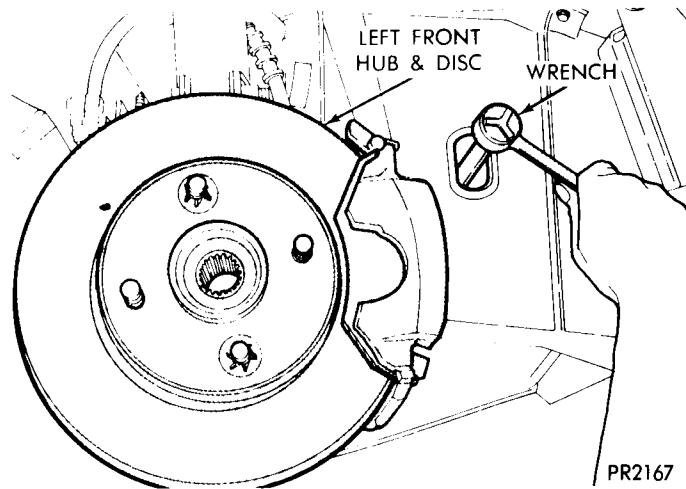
Remove or Install Access Plug in right Splash Shield to Rotate Engine Crankshaft
